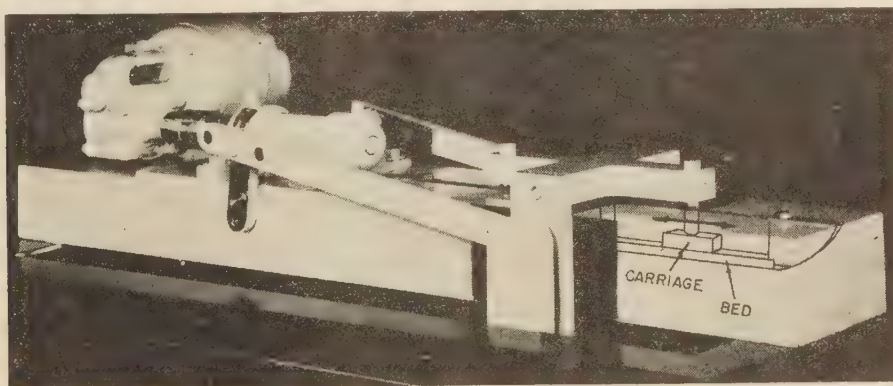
A RECIPROCATING WEAR-TESTING MACHINE USED FOR SIMULATED LATHE-BED SERVICE WEAR TESTS
